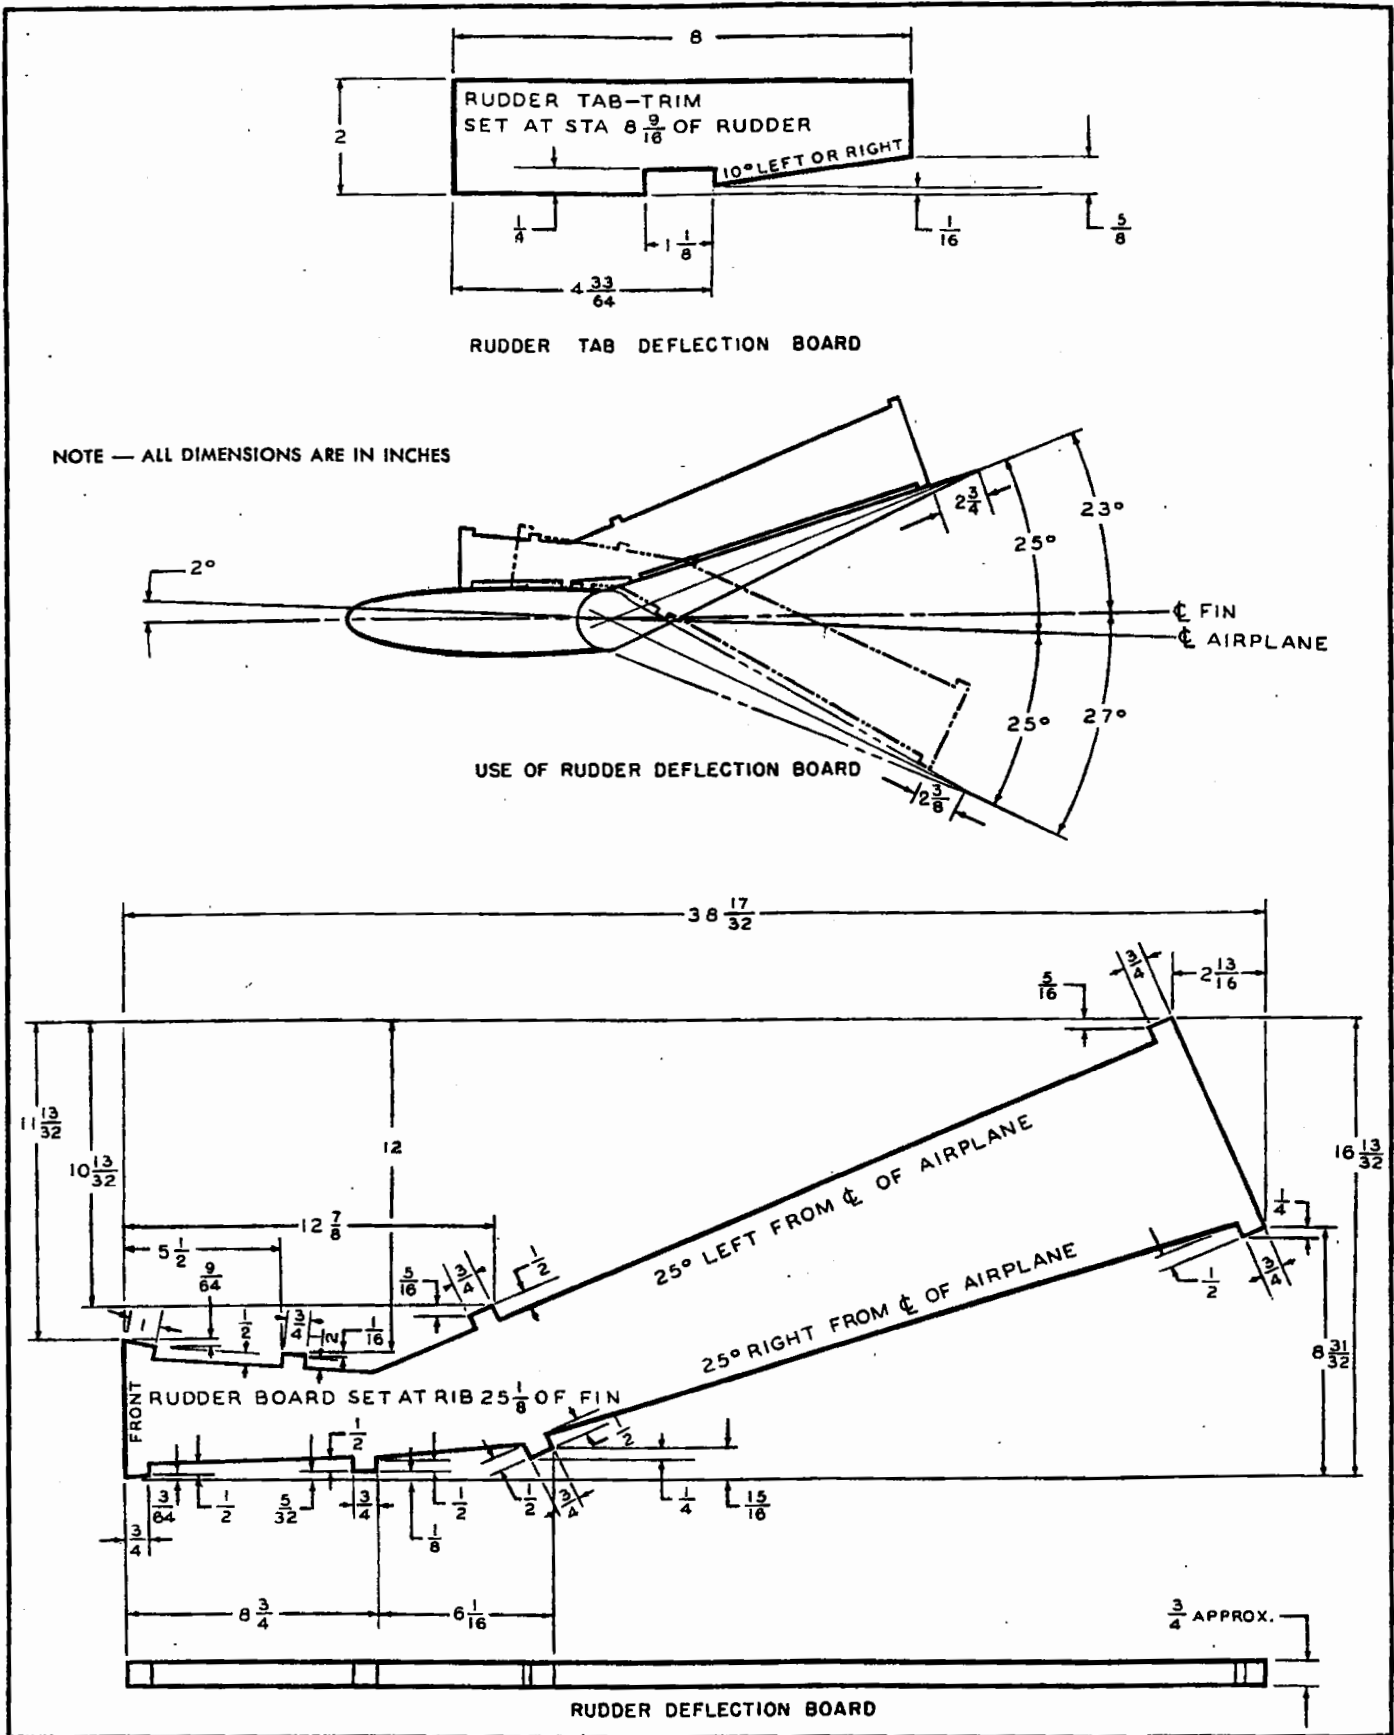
Rudder and Rudder Tab Travel Checking Boards.
